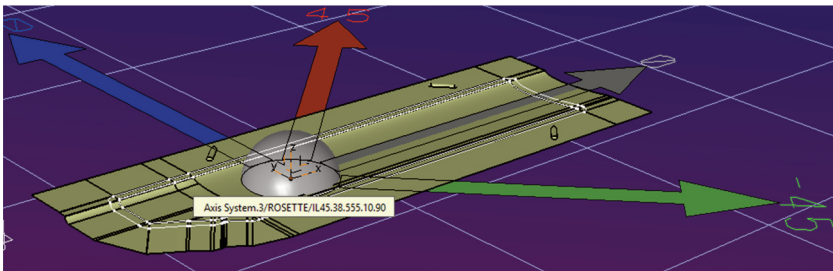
Right handed rosette on the rotor blade mould tool surface [Krauze, 2016]
